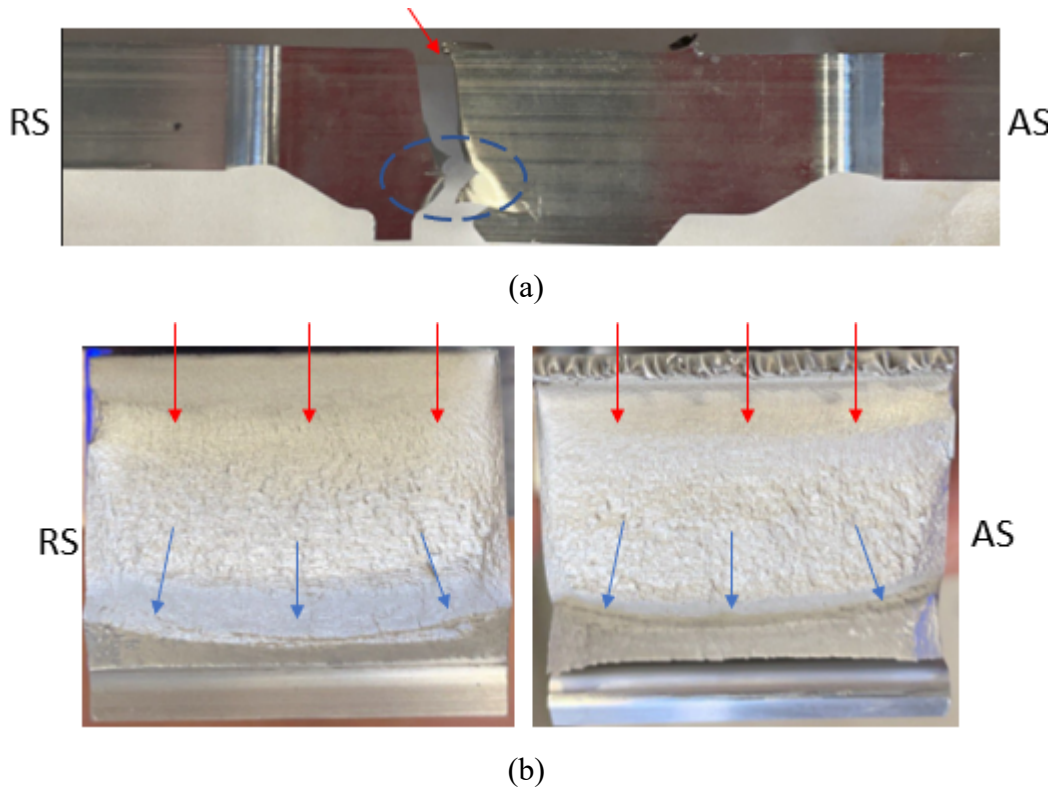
Macro fracture images of 16mm specimens after fatigue loading. Transverse image of fracture(a), crack initiation at the bottom (red arrow) and residual fracture (highlighted blue). Fracture of surface (b) shows crack initiation from the unbonded region (red arrow) with crack propagation (blue arrow). Black dots from solvents during CNC machining (highlighted red).
